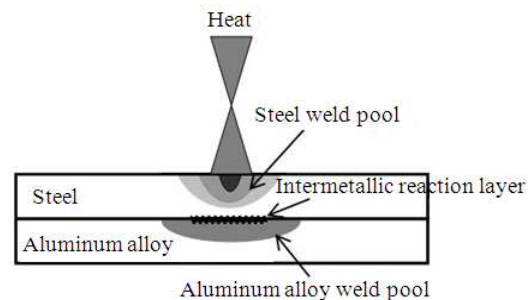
Schematic of the interface during dissimilar metals welding between steel and aluminum alloy
